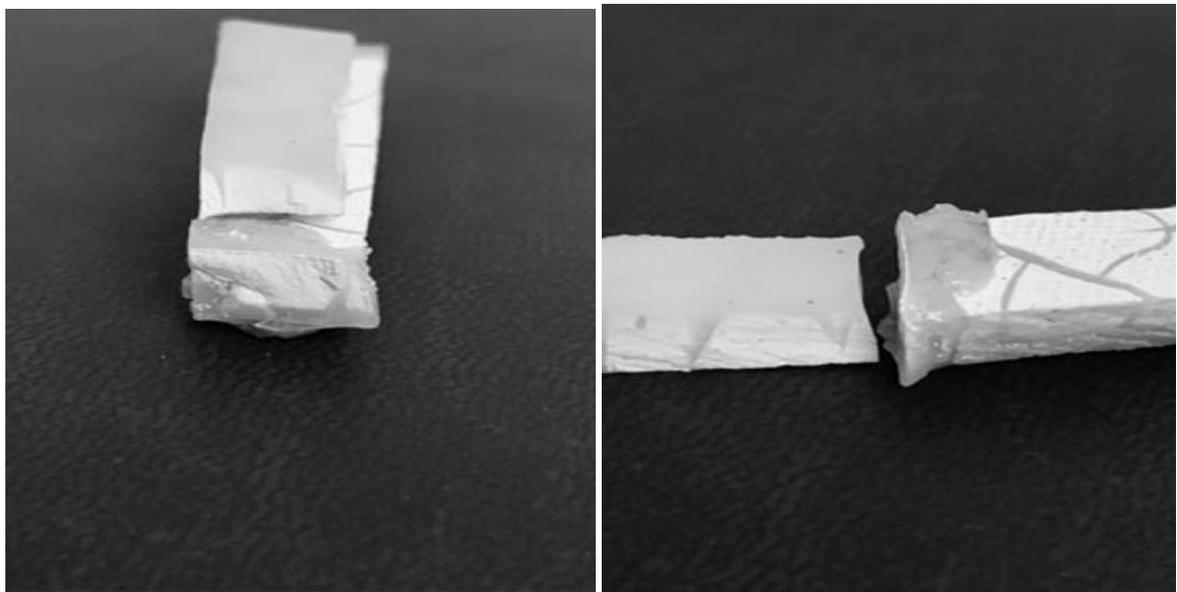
PHB welded specimens destroyed during the tensile tests.
